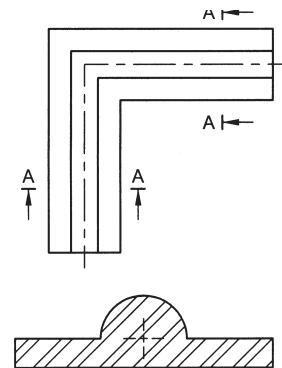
DETAILS OF MOULDED CORNER SEAL
